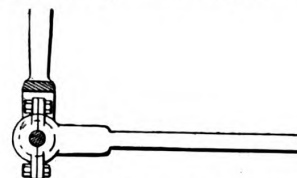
BALL JOINT ON THE STEERING ARM OF THE MERCEDES-MIXTE CAR.
